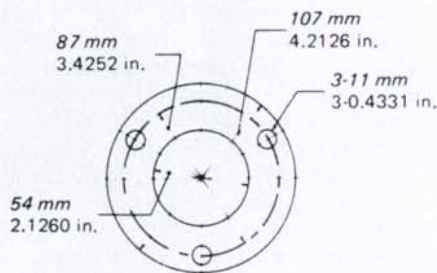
A—Mounting plate can be fabricated using dimensions shown.
